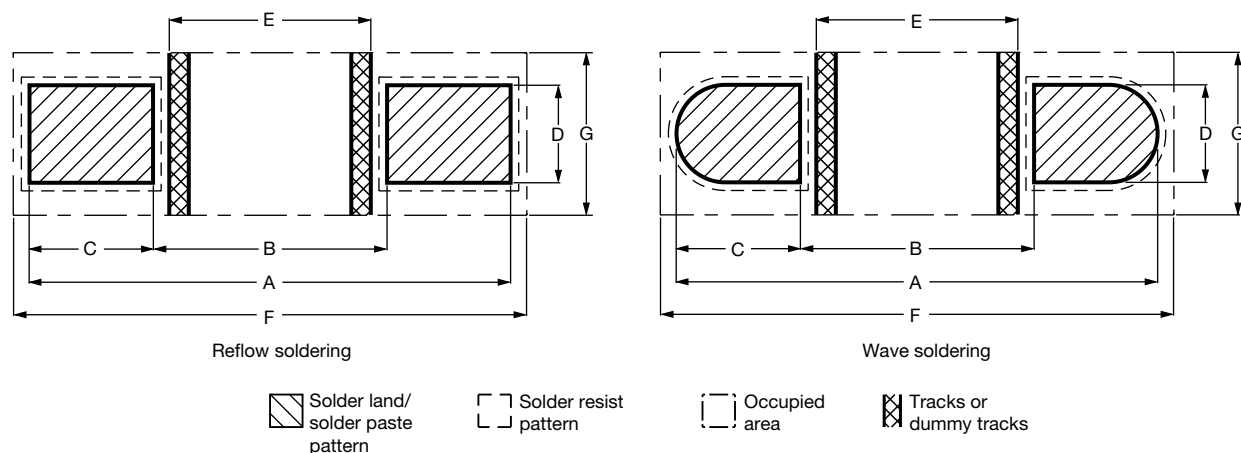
Recommended pad dimensions for reflow and wave soldering
